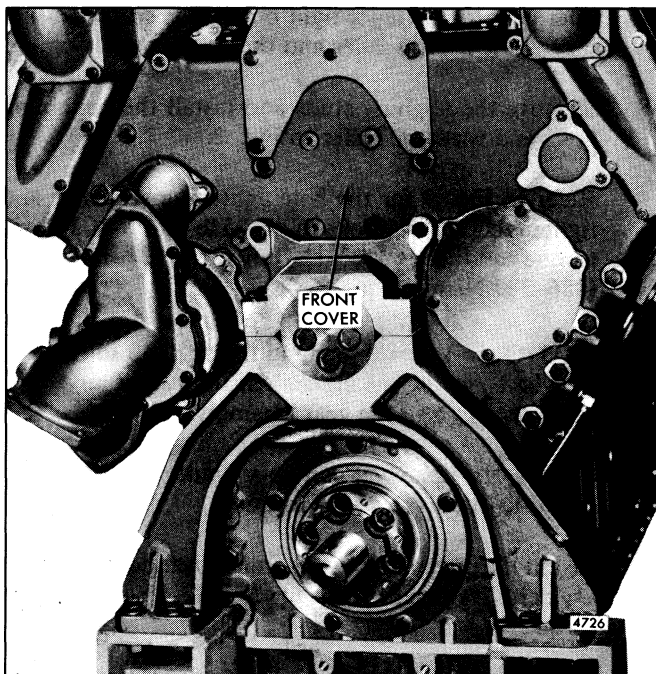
Front Cover Mounting on 1 2V-149 Engine
